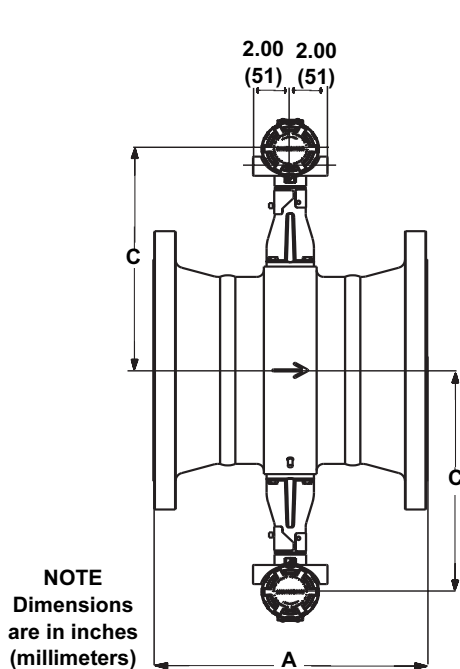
Vortex Dual-Sensor Style Flowmeter Dimensional Drawings
